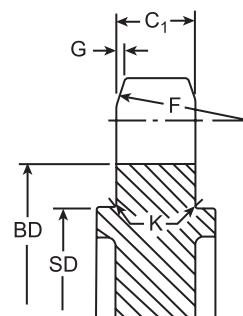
Notation for wheel rim profile of roller chain.
